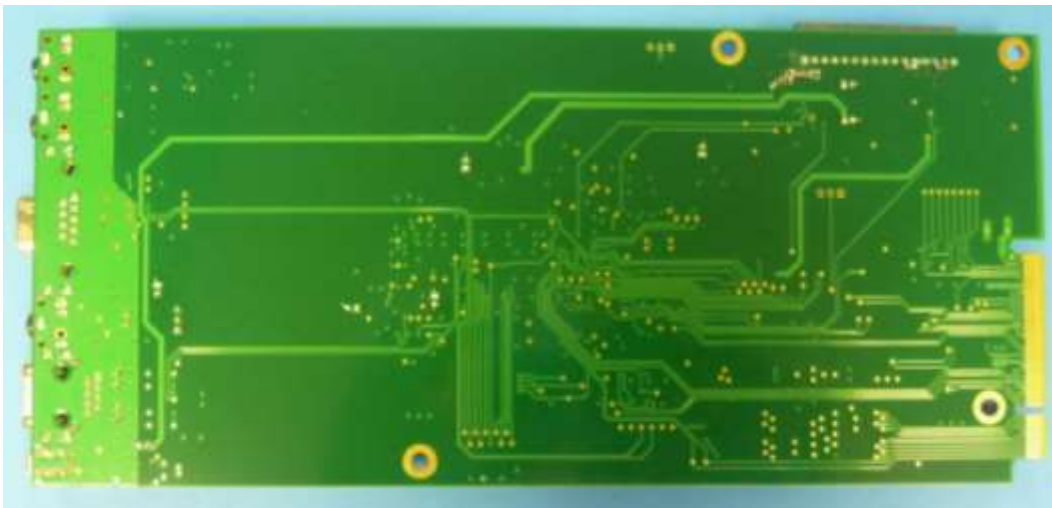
Photo of No5805 and No5802 Control PCB (Bottom View)
